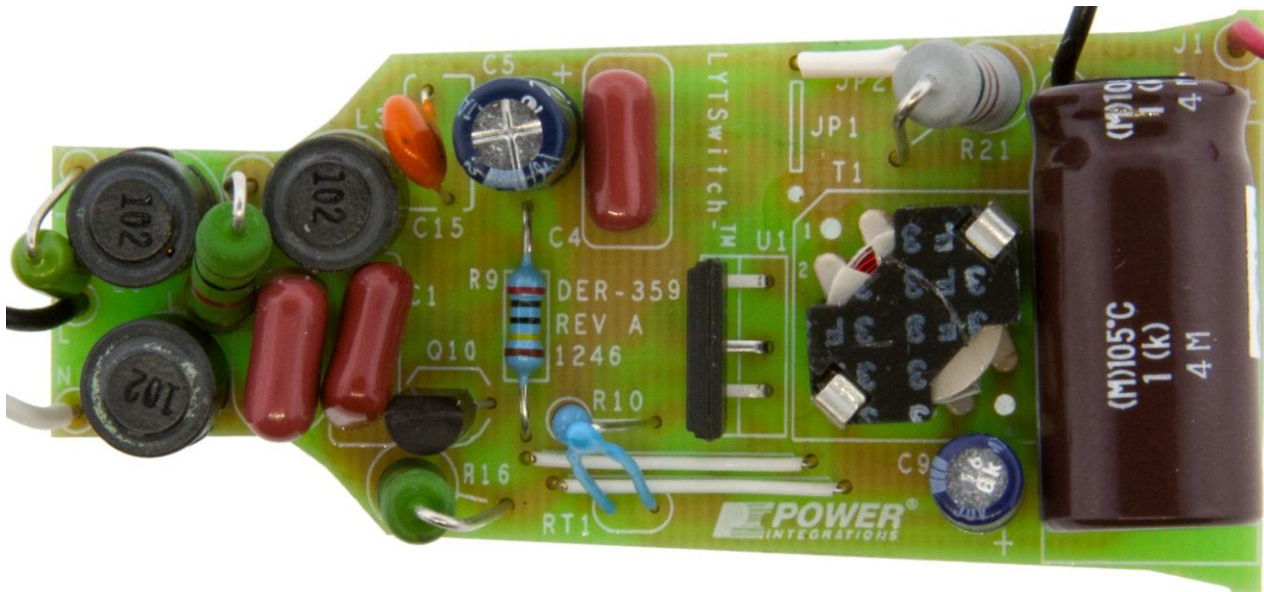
Populated Circuit Board (Top Side). L: 2.79" [70.7 mm] x W 1.33" [33.7 mm].
